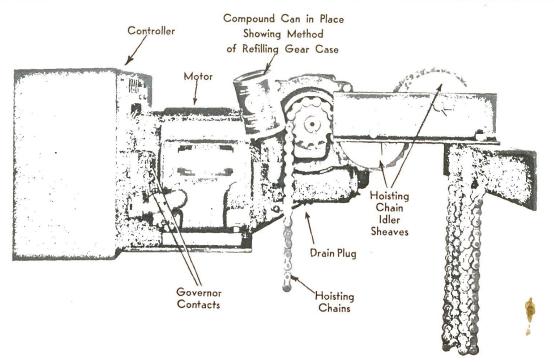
SIDE VIEW OF HomeLIFT 20 HOISTING MACHINE
